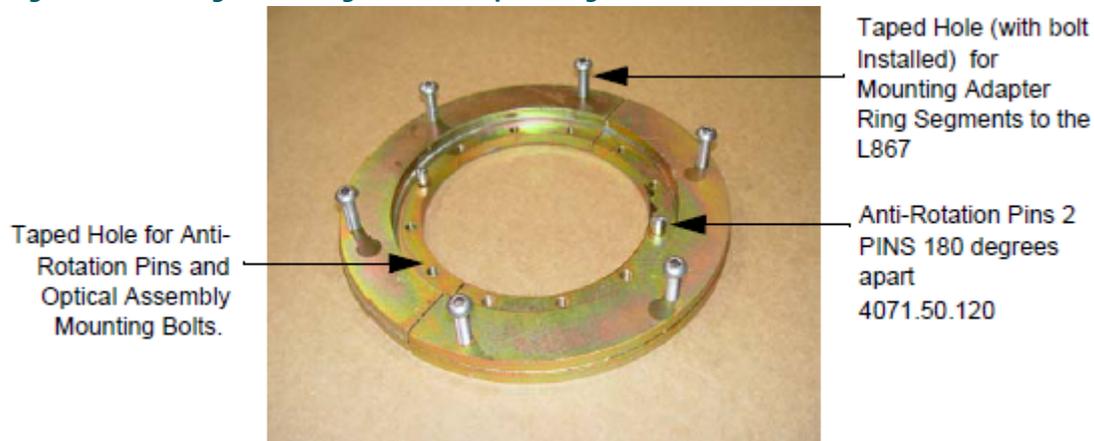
Mounting Bolts – Segmented Adapter Ring for L867D
